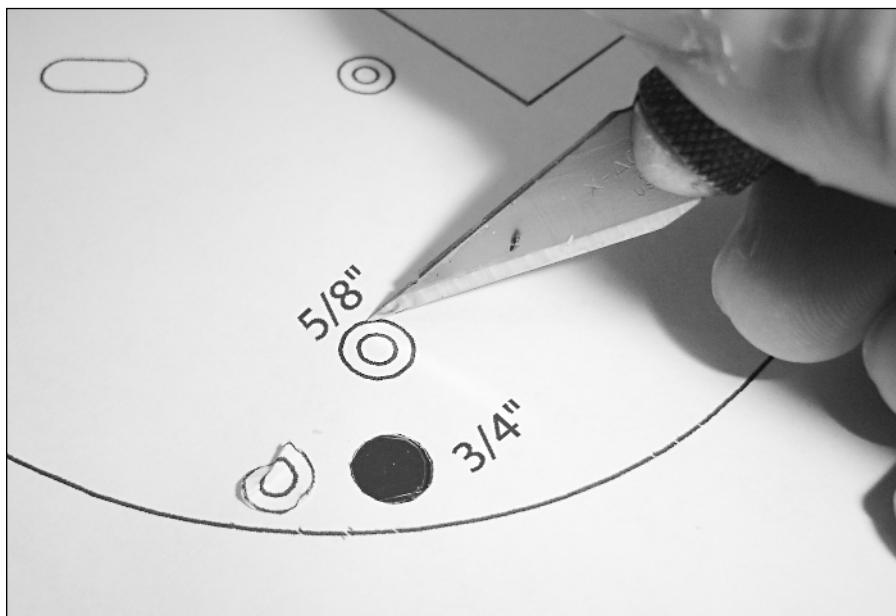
Cutting out the screw posts on the second pattern.
